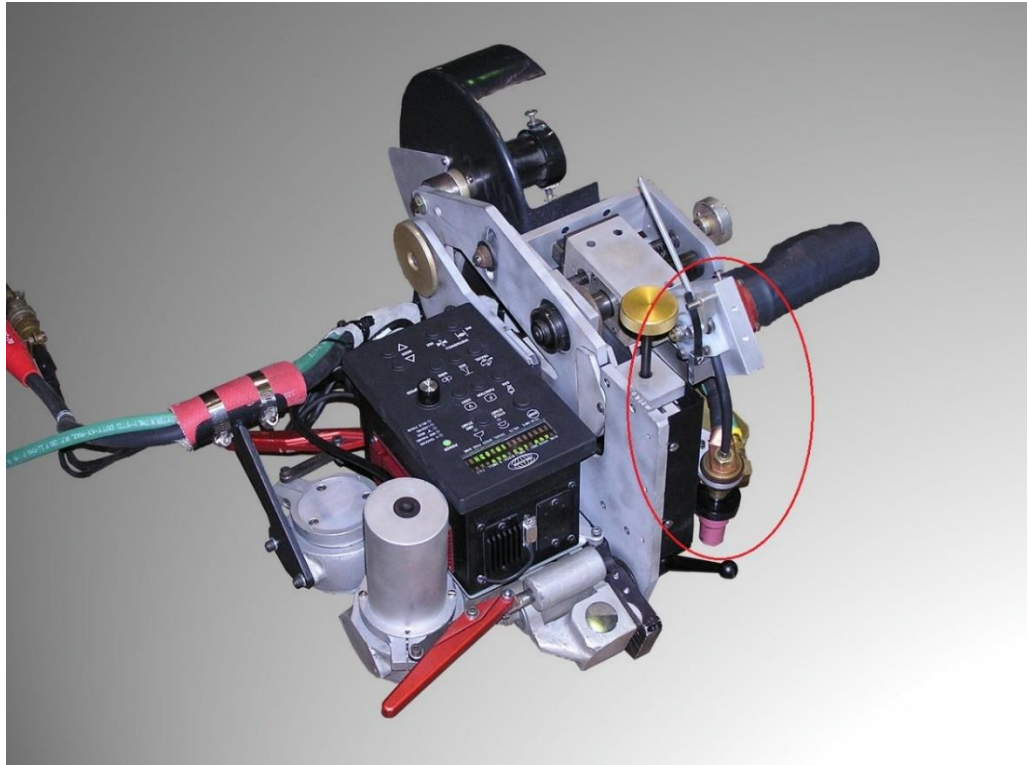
welding head M-300 designed for welding non-stop joints of main pipelines.
